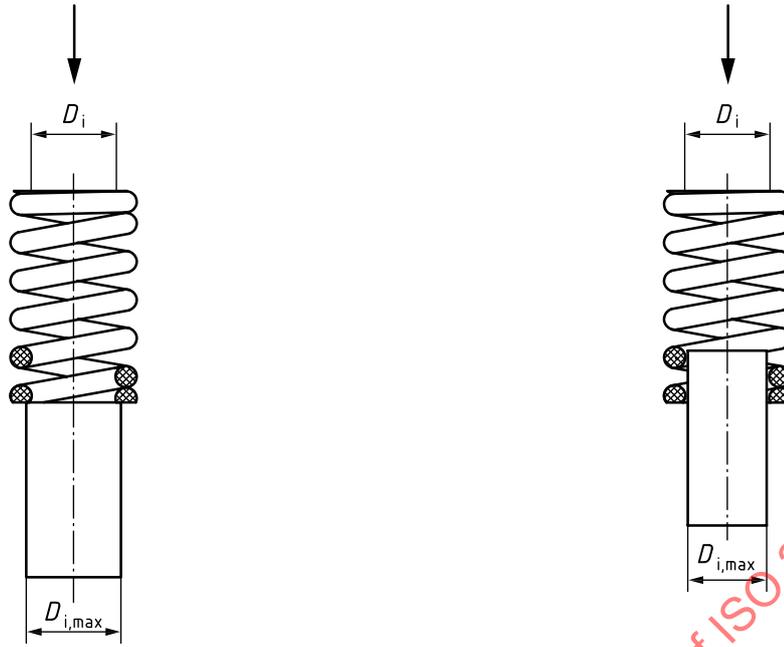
Method of measurement of the inside diameter ( $D_i$ ) with calliper (example)
